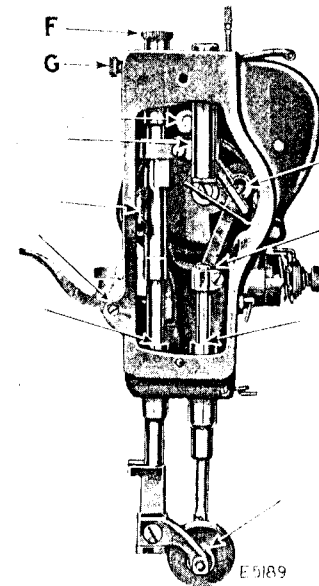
END VIEW OF MACHINE, SHOWING OILING POINTS
